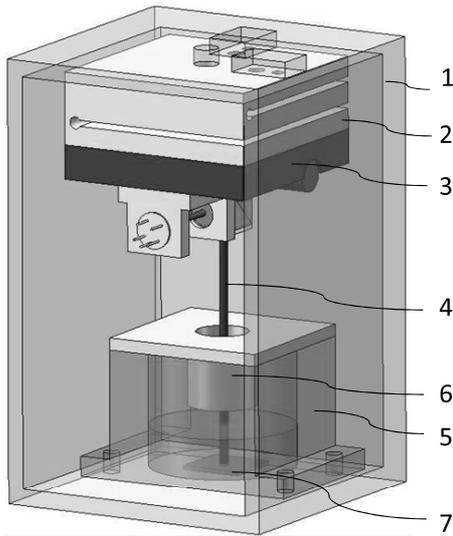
Assembled structure of dual-axis level containing: (1) frame, (2) adjustable mechanism, (3) optical module, (4) laser beam, (5) container, (6) leakage prevention tube and (7) plane mirror.
